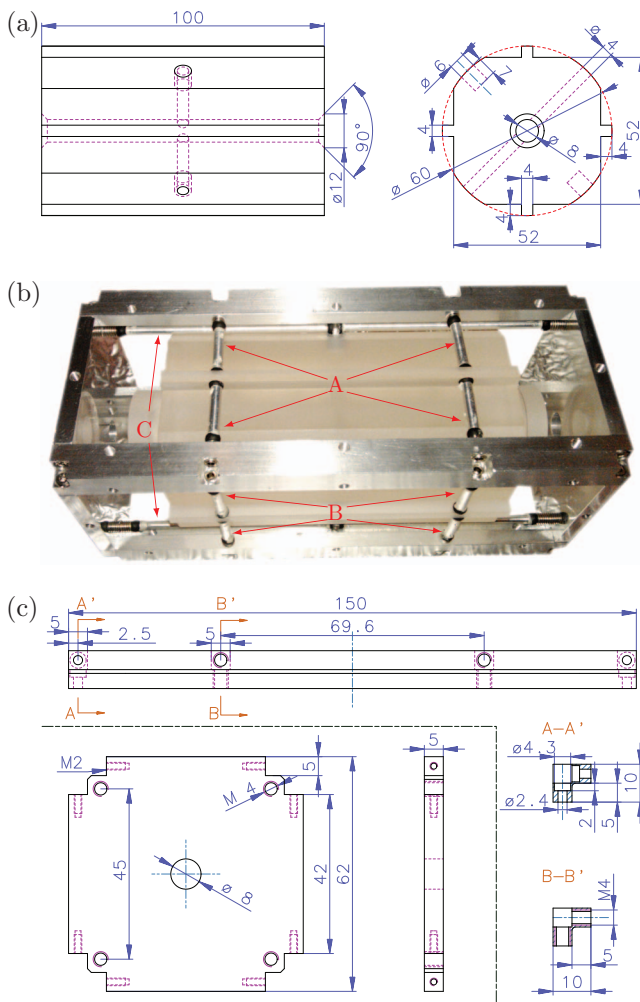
(a) Technical drawing of the cavity spacer. (b) Photo of the cavity in the supporting frame. (c) Simplified mechanical drawing of the supporting frame. The unit is 1 mm.
